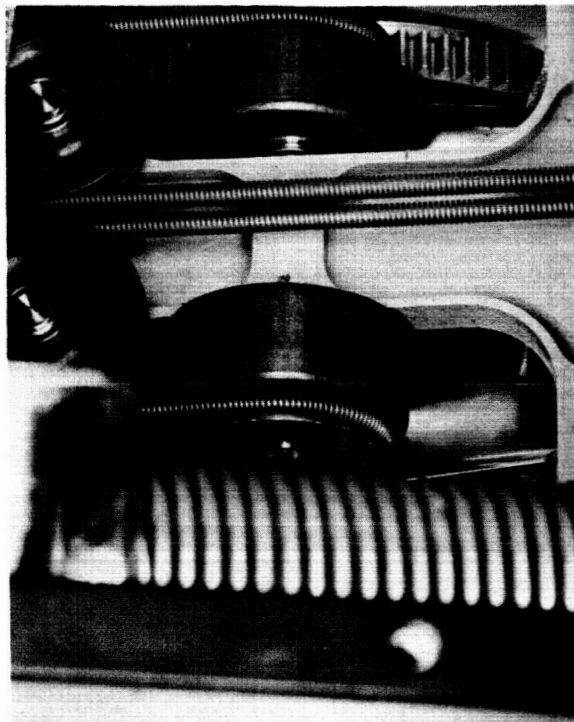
Crease in Guide of Erection Unit Before Disassembly, Primary Boom Package T-1a
